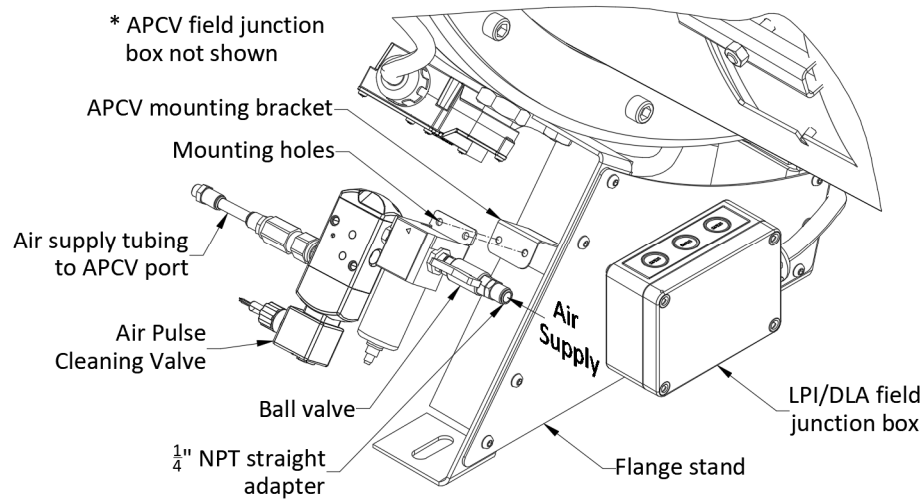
APCV Attachment to DFI Valve Flange Stand
